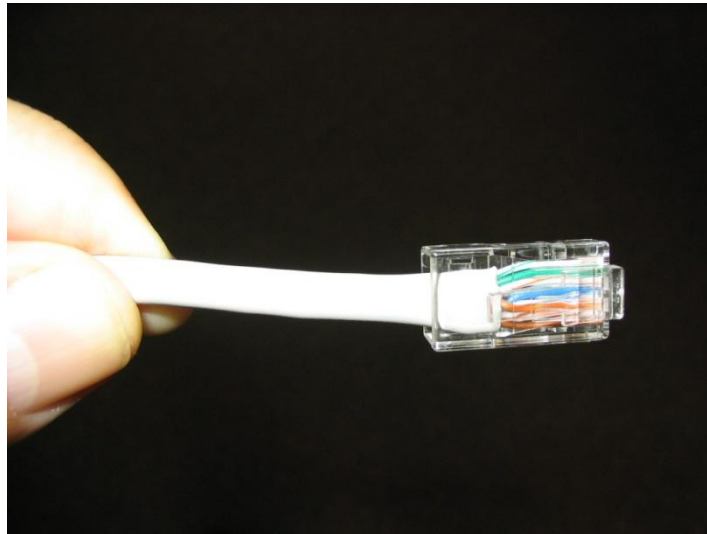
Connection of 8P8C modular plug — crimping the plug
